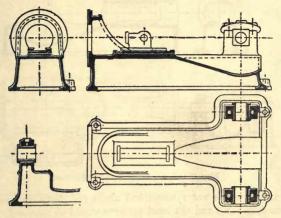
and 42.—Frame, with double (top and bottom) slipper guides with flat surfaces.
